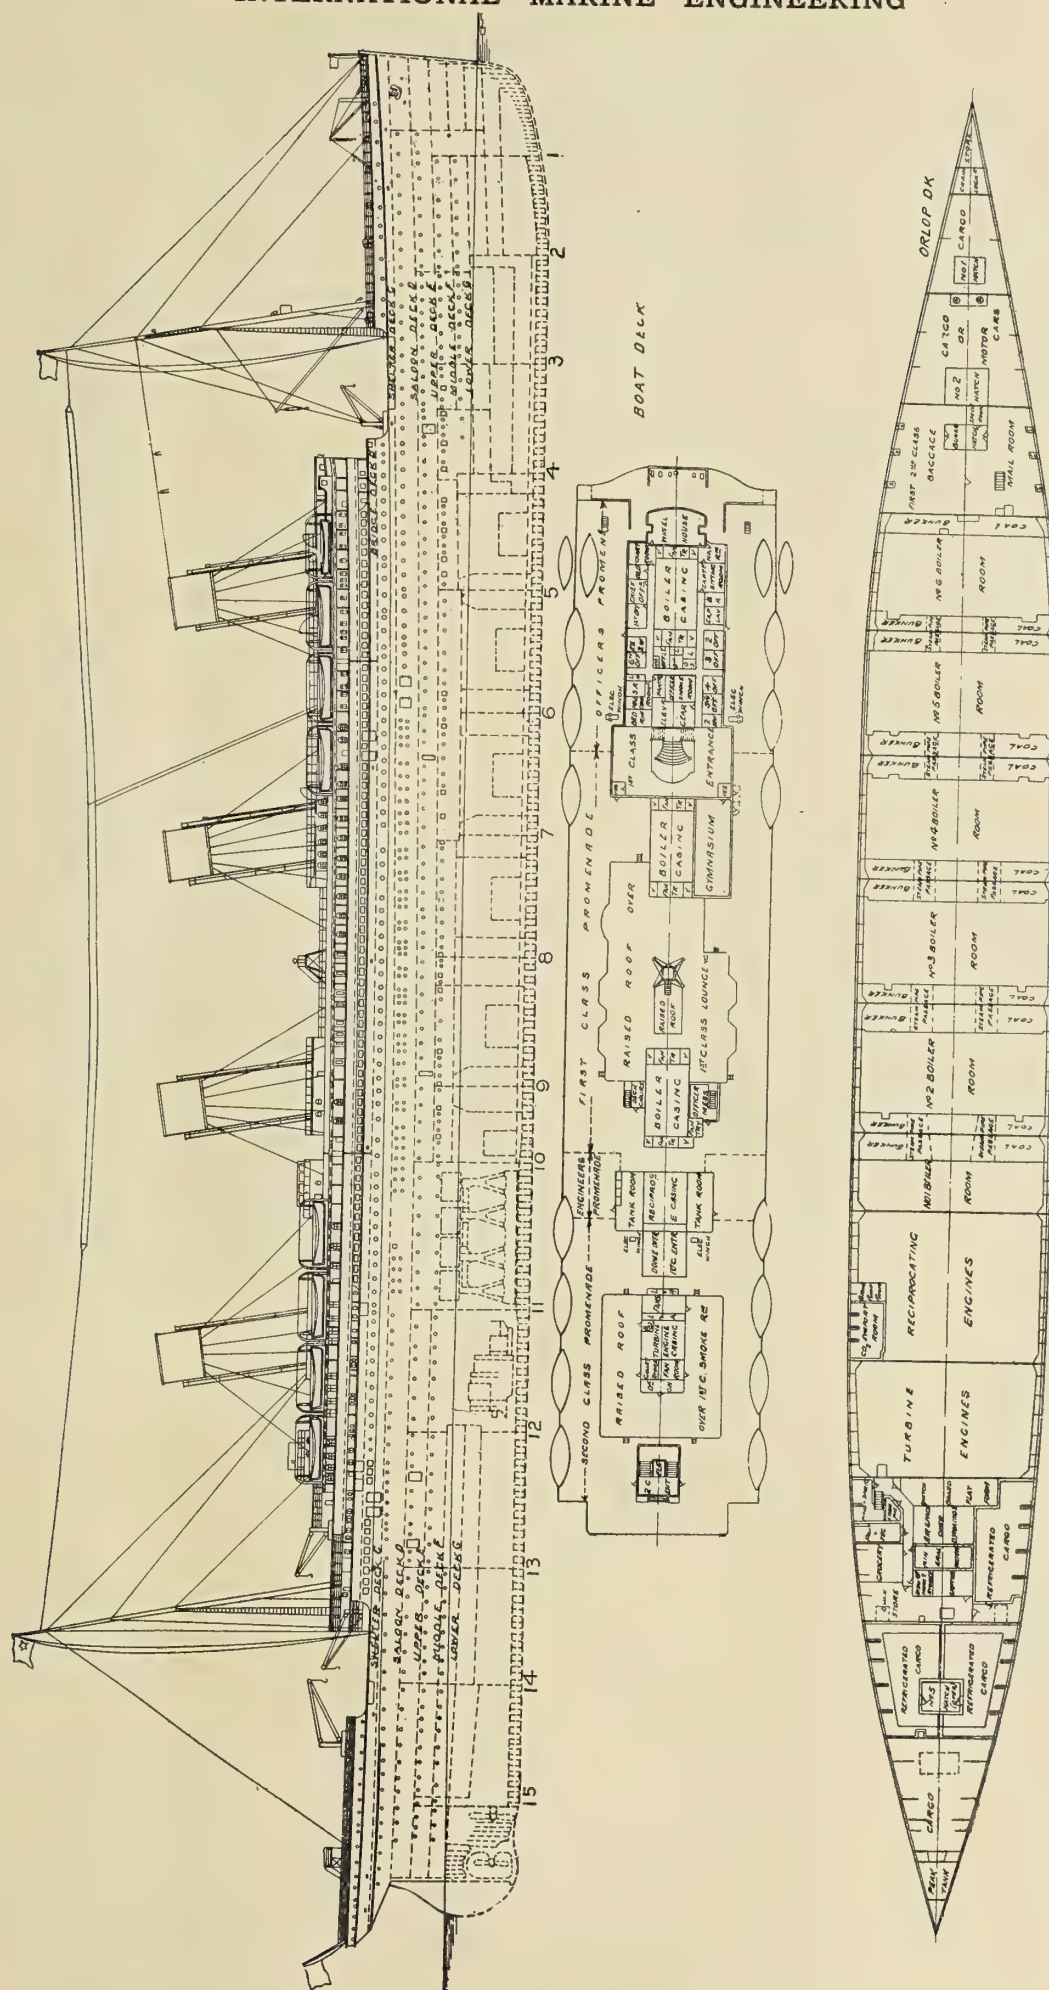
TITANIC, OUTBOARD PROFILE, BOAT DECK AND ORLOP DECK PLANS
